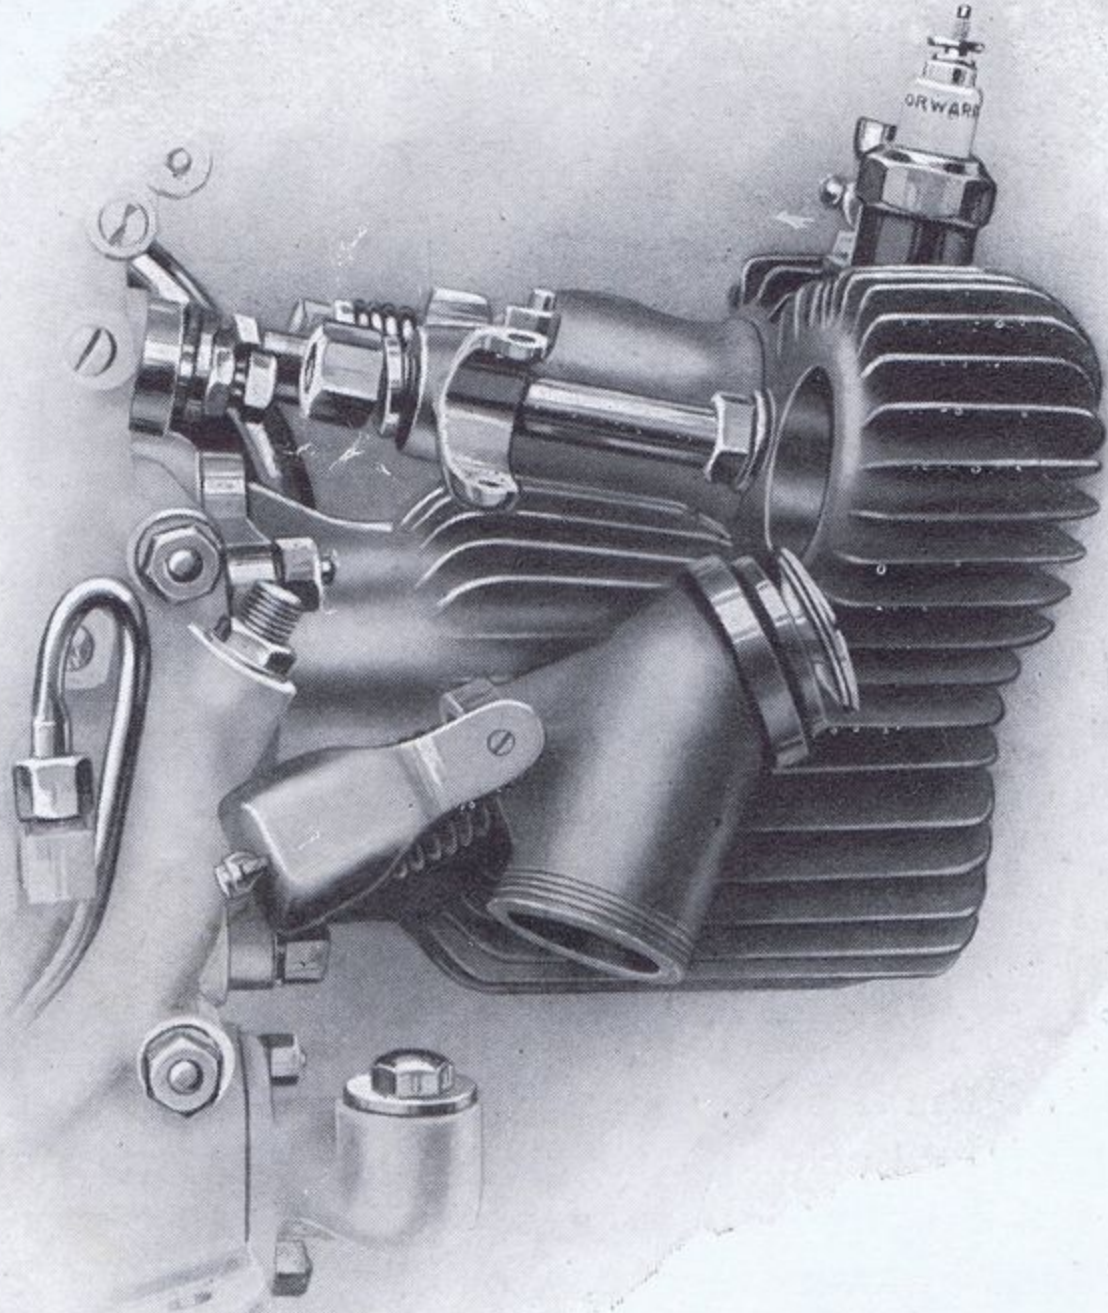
Detachable Valve Pocket, showing Valve Seat.
